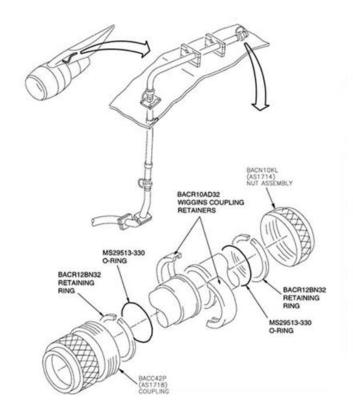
Full Flex Fuel Coupling Assembly Parts Breakdown
